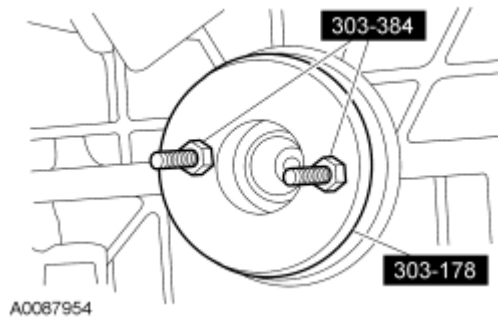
Identifying Special Tools (303-384 And 303-178)
